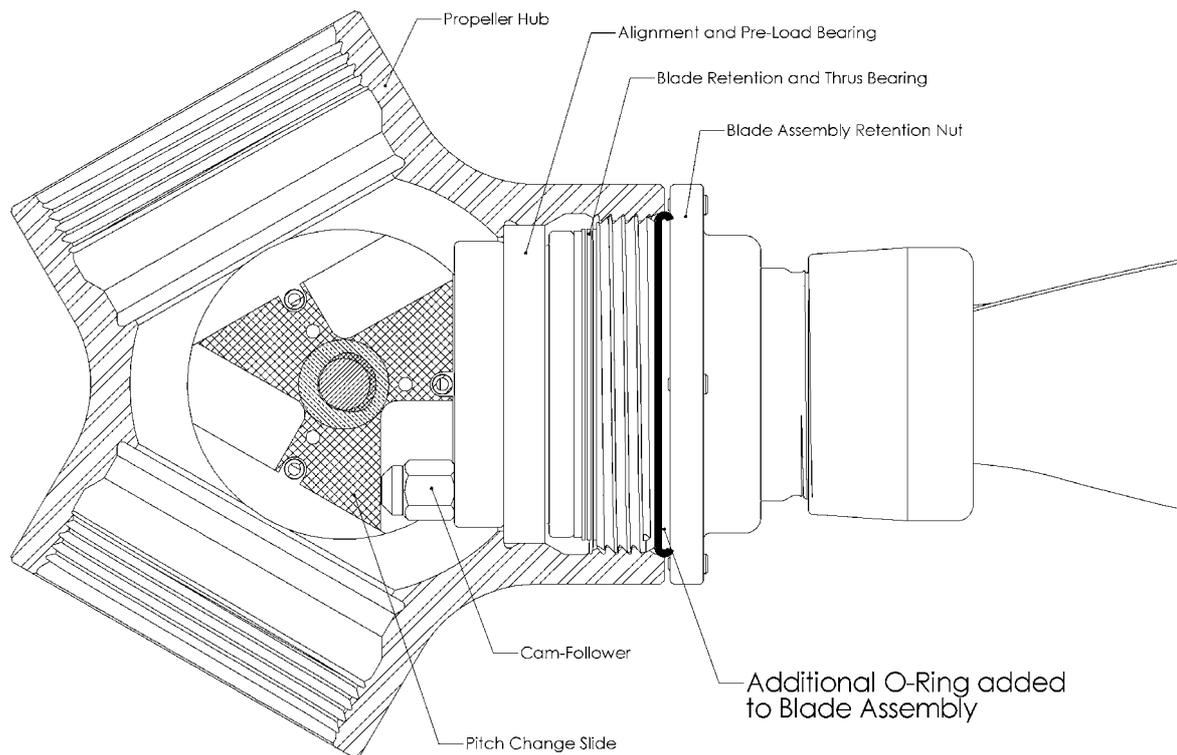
Blade Assembly Mounted in Propeller Hub showing Location of Additional O-Ring added to Blade Assembly
